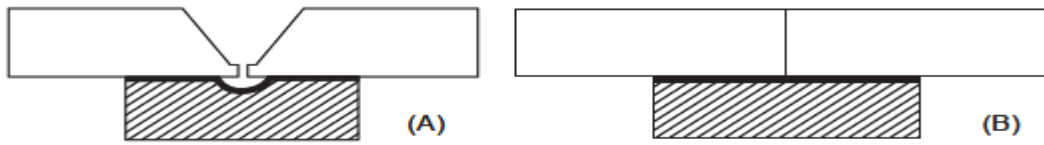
copper backing for SAW (A) V-groove butt (B) square butt
